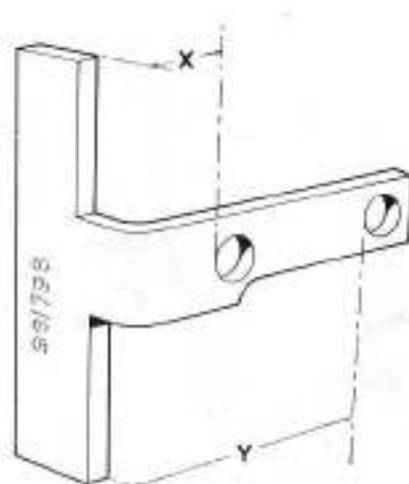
Adjusting gage (David Brown part No. 961796) for hydraulic control mechanism. Dimension "X" is 0.437; dimension "Y" is 1.580.
